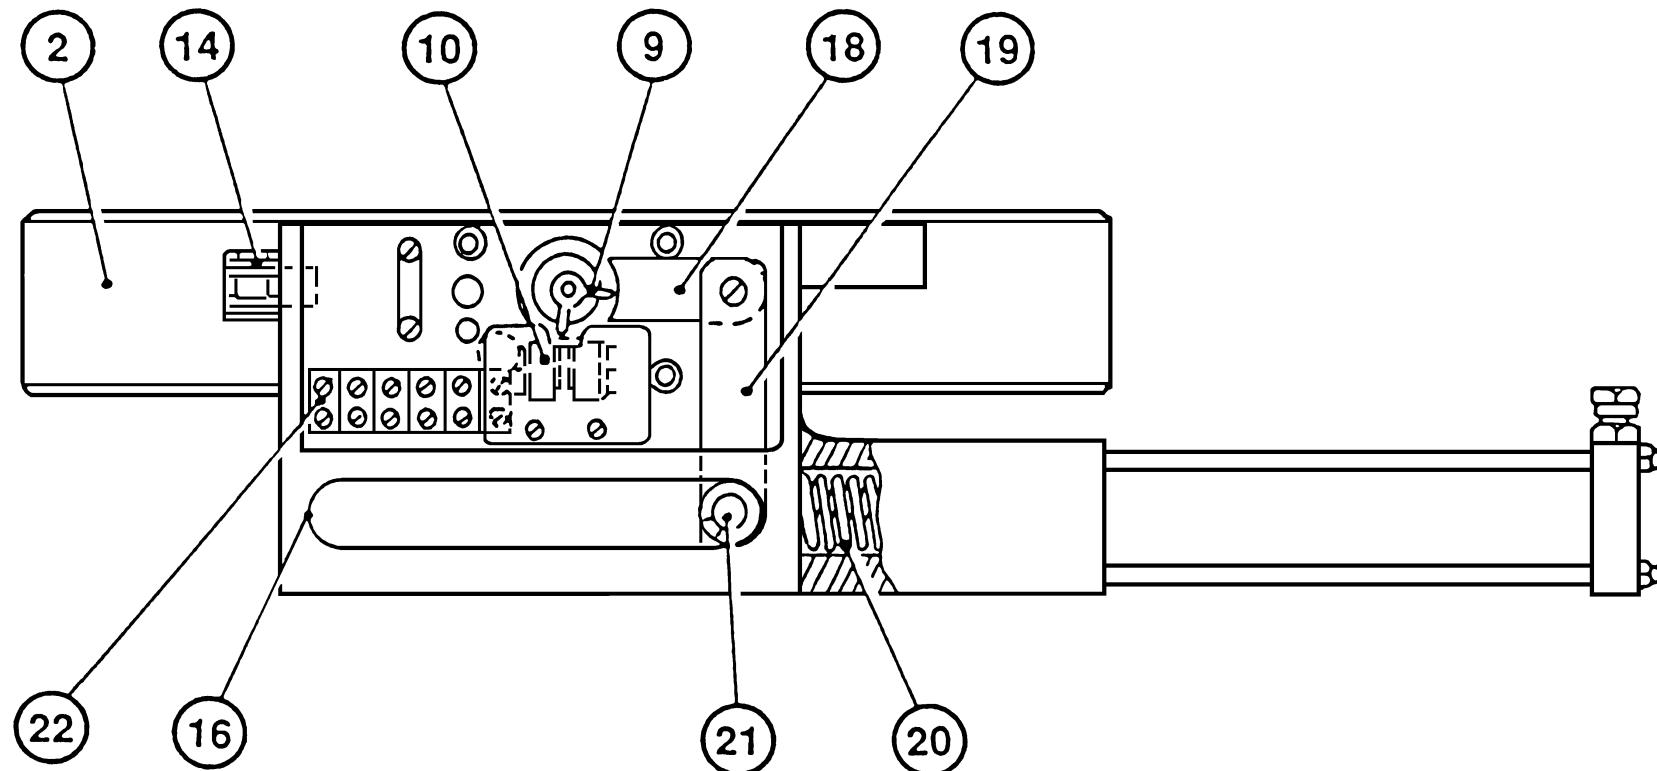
Side view of pneumatically actuated QSB250P valve: key
